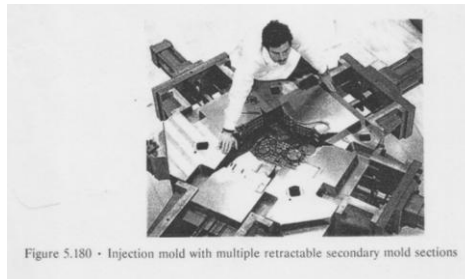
• Injection mold with multiple retractable secondary mold sections
